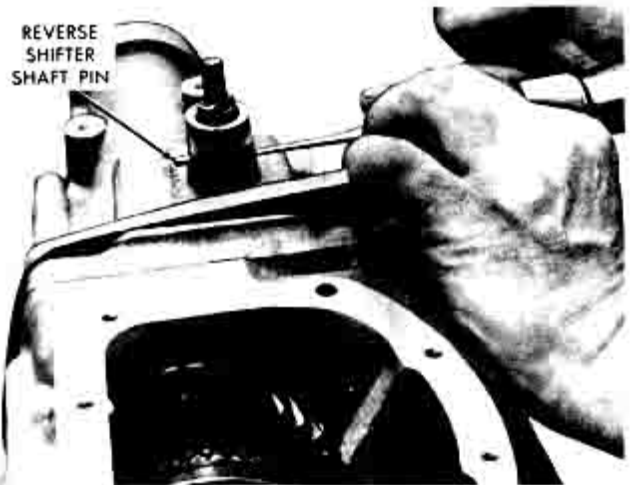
Removing Reverse Shifter Shaft Lock Pin
